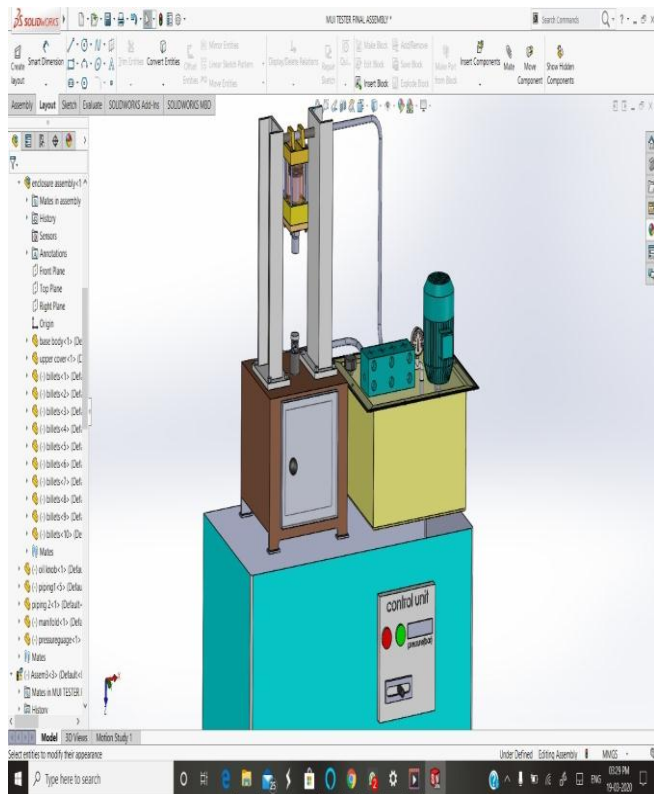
ASSEMBLY OF HYDRAULIC ACTUATED FUEL INJECTOR TESTOR
